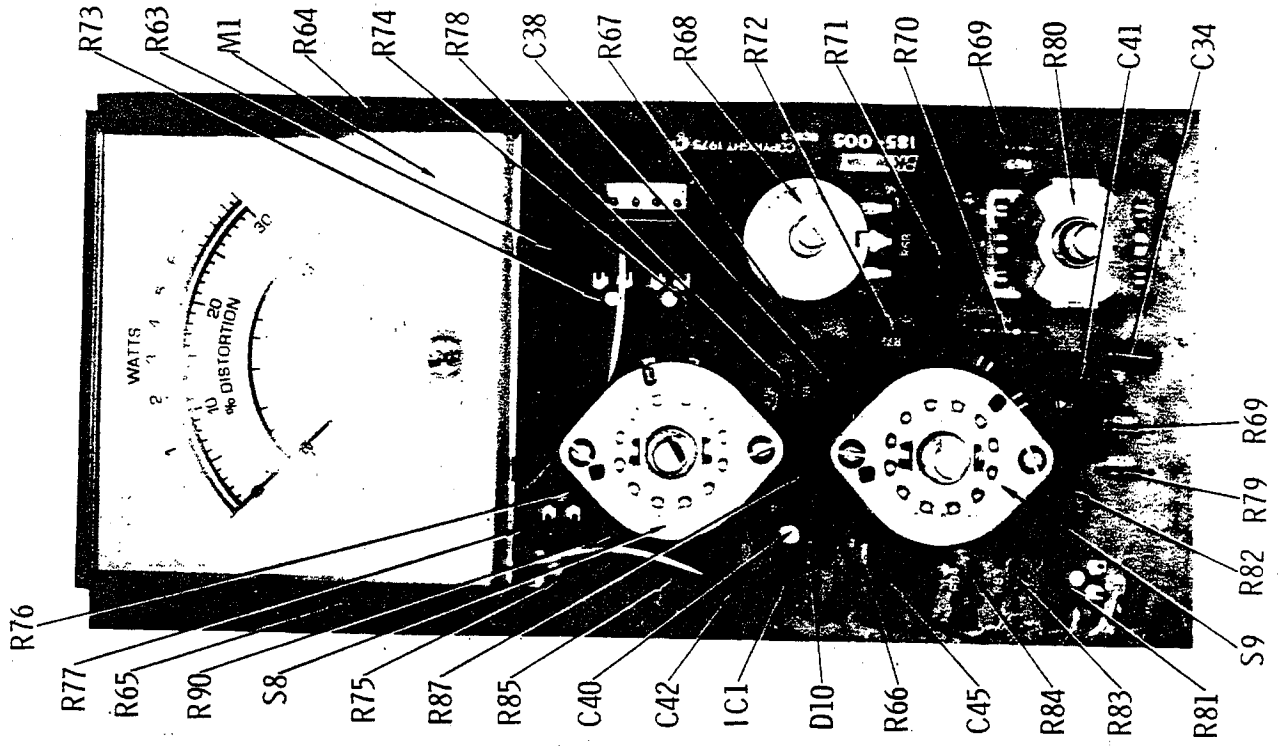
Audio Printed Circuit Board, Top View, Parts Location.
